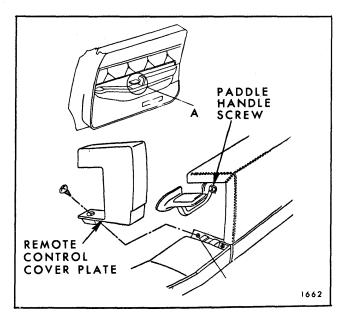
Remote Control Handle and Cover Plate -Front Door Shown - Rear Door Typical
